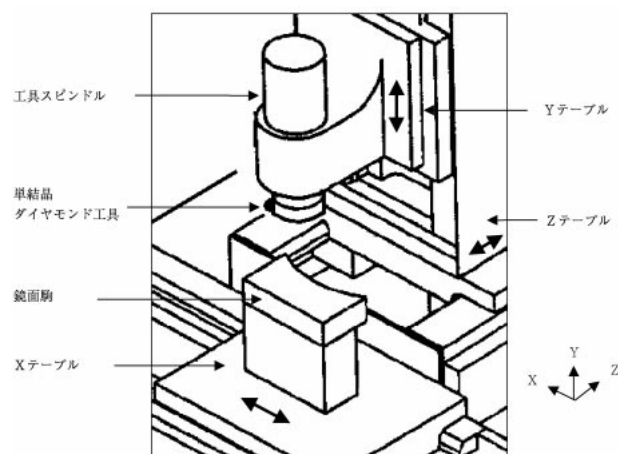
Schematic view of 3-Axis Ultraprecision Machine.
